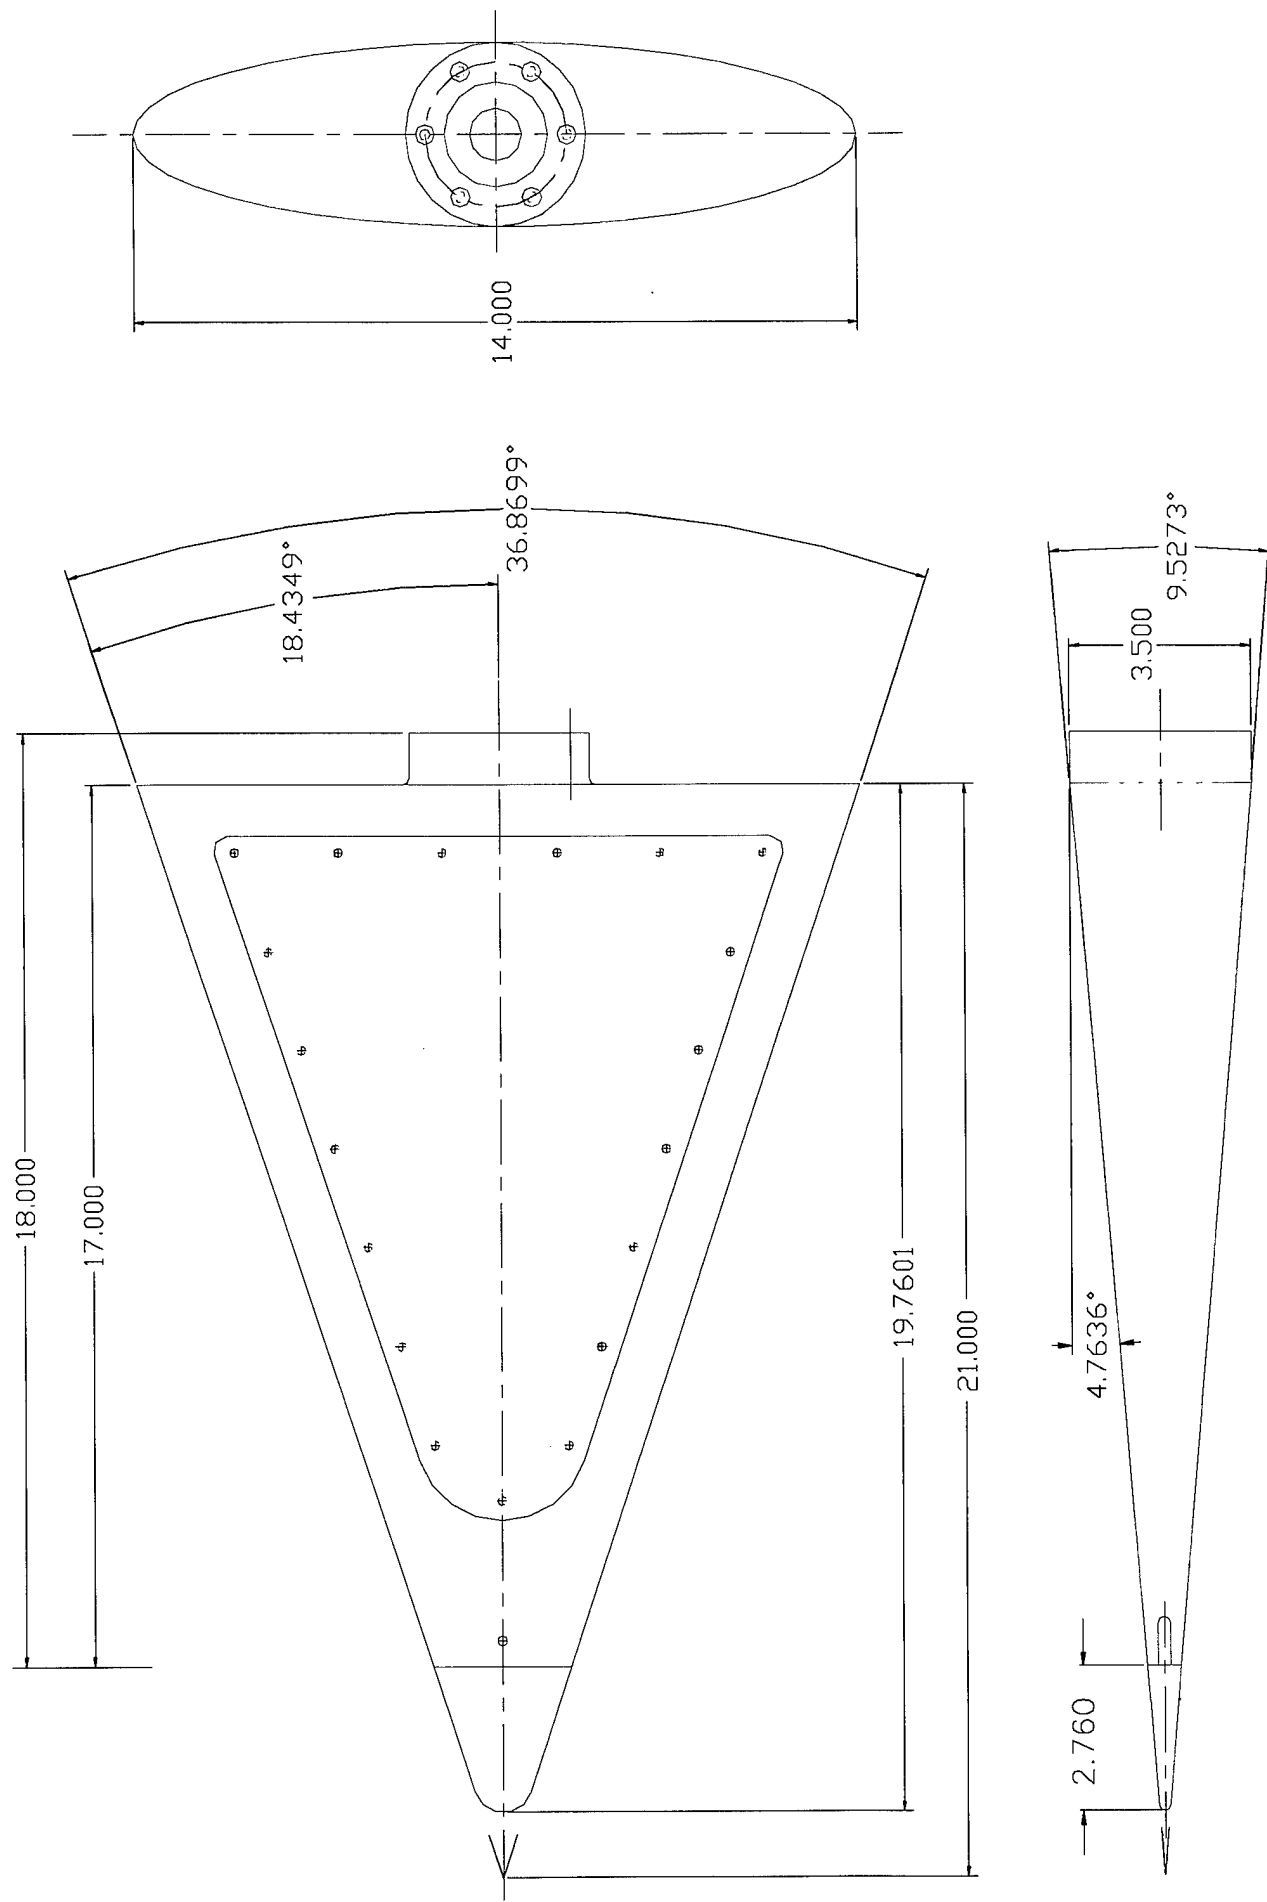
DRAWING OF ELLIPTICAL CONE MODEL
